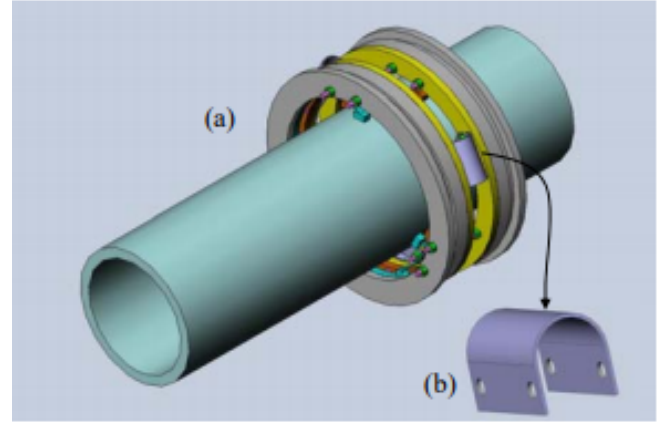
(a) The pipe crawler with (b) an SMA U-shape that actuates it, Balaji [3].
